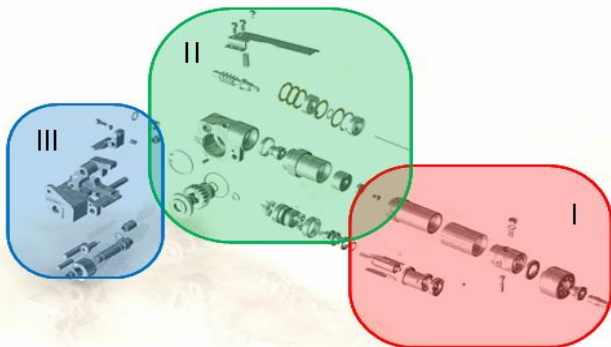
Component of Puenmatic Tensioner (I: Air motor, II: Decelerator, III: Head)
